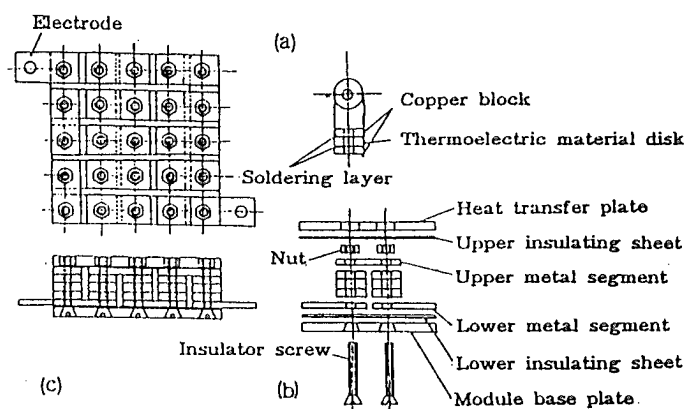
The new-type module assembled by screwing using hamburger-type thermoelectric elements
